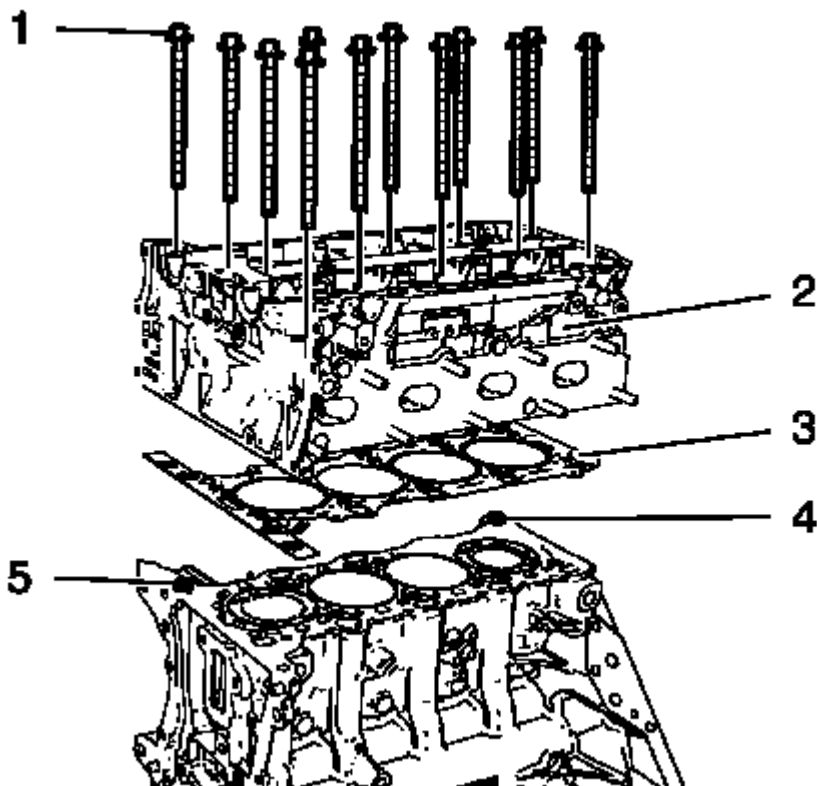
Cylinder Head, Cylinder Head Gasket, Cylinder Head Bolts And Guide Sleeves
